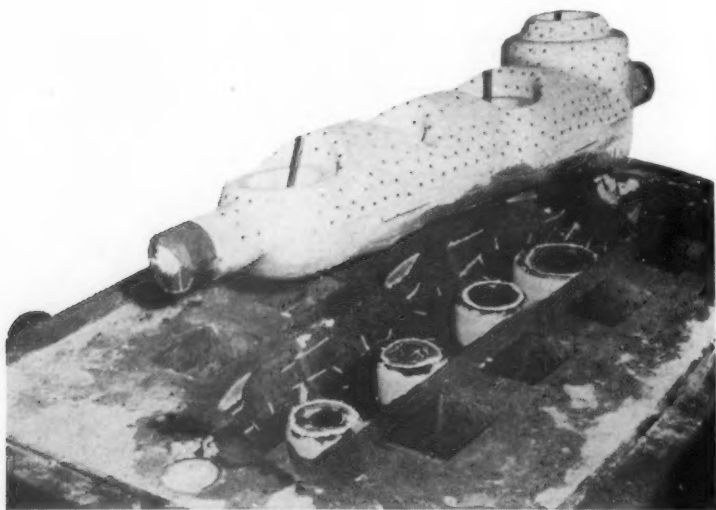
CORE ASSEMBLY FOR THROTTLE VALVE BODY MADE AS SHOWN IN FIG. 29.
